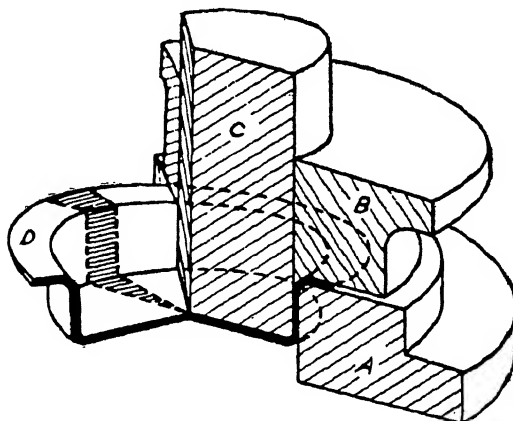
Cupping. (A) Part of drawing die, (B) blank holder, (C) punch, (D) cup.
